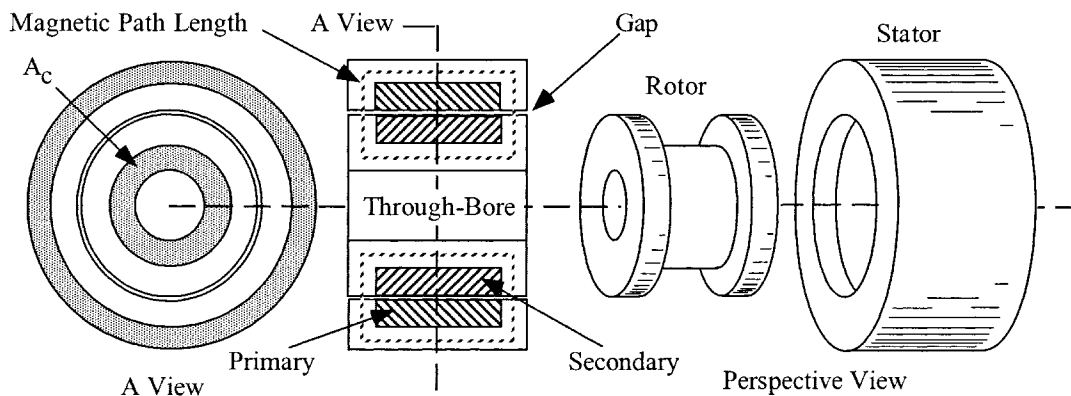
Open View of an Axial Type Rotary Transformers.
